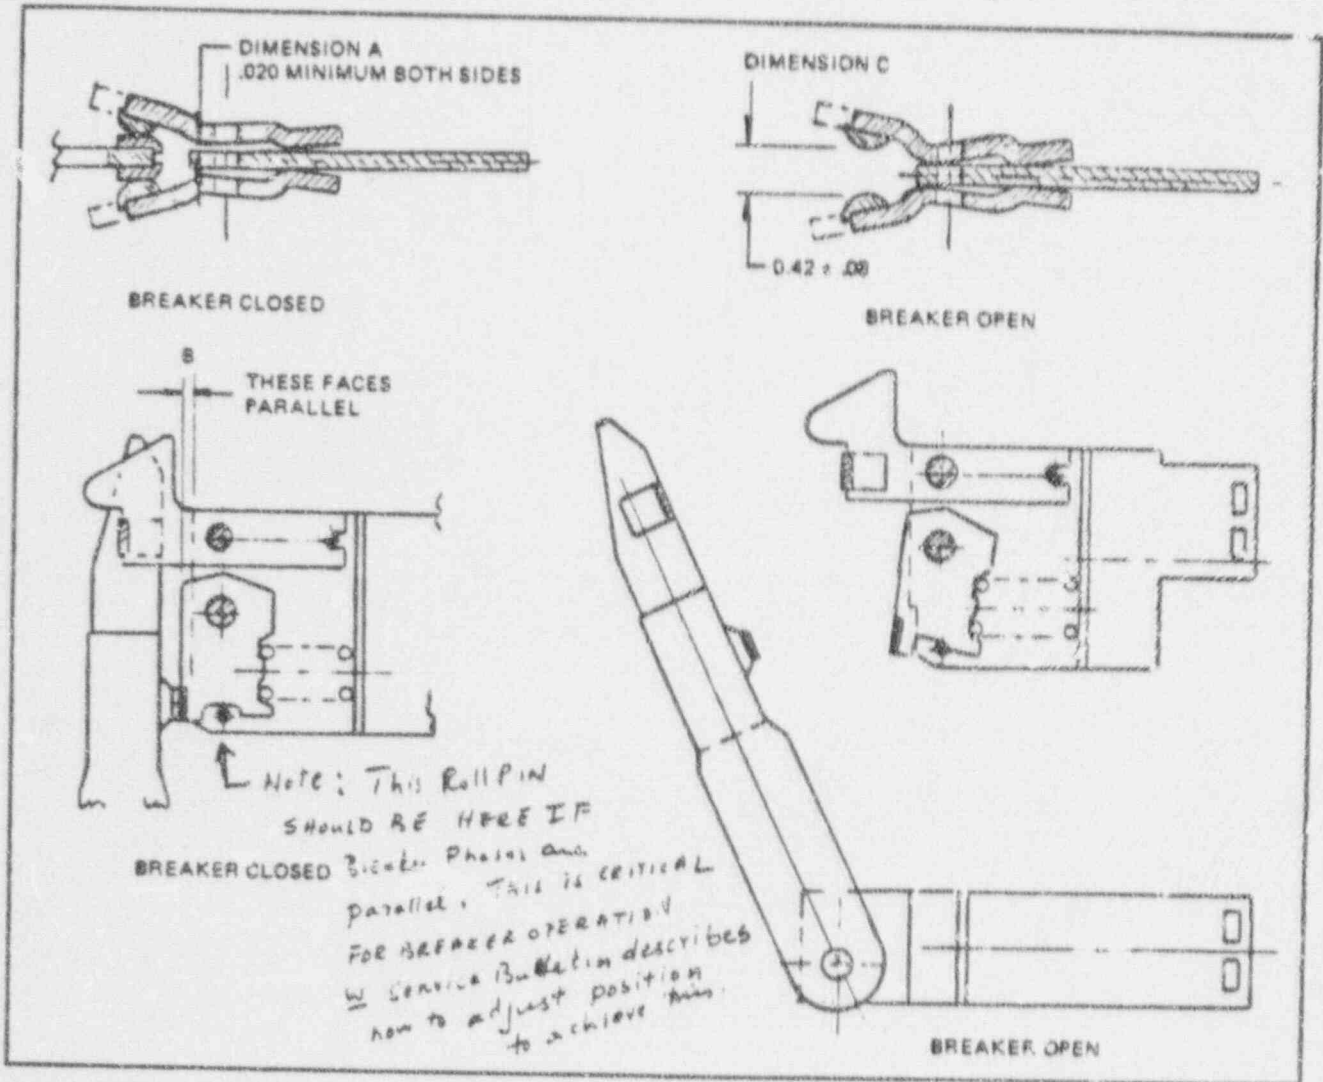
Contacts and their Adjustment, DS-206 Breaker
